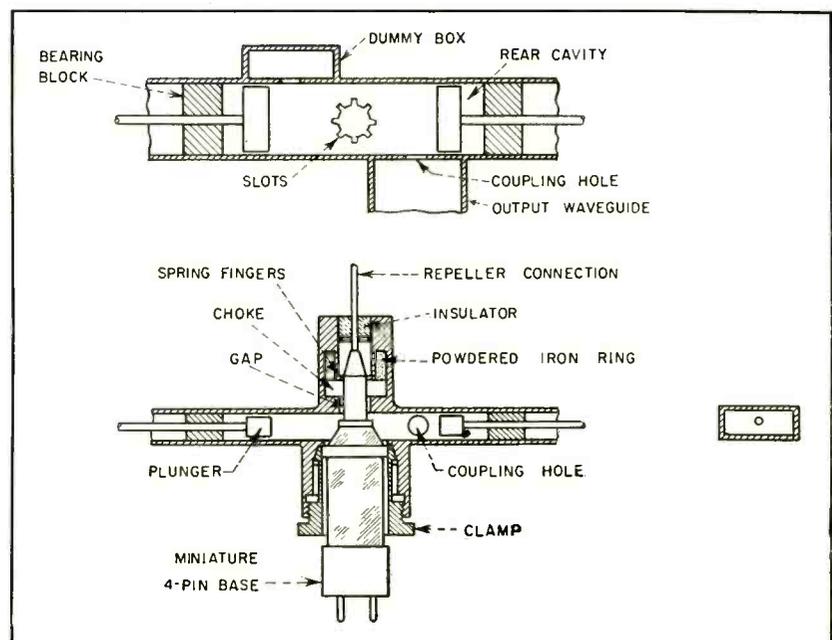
Top, front and side sectional views of tunable waveguide oscillator
